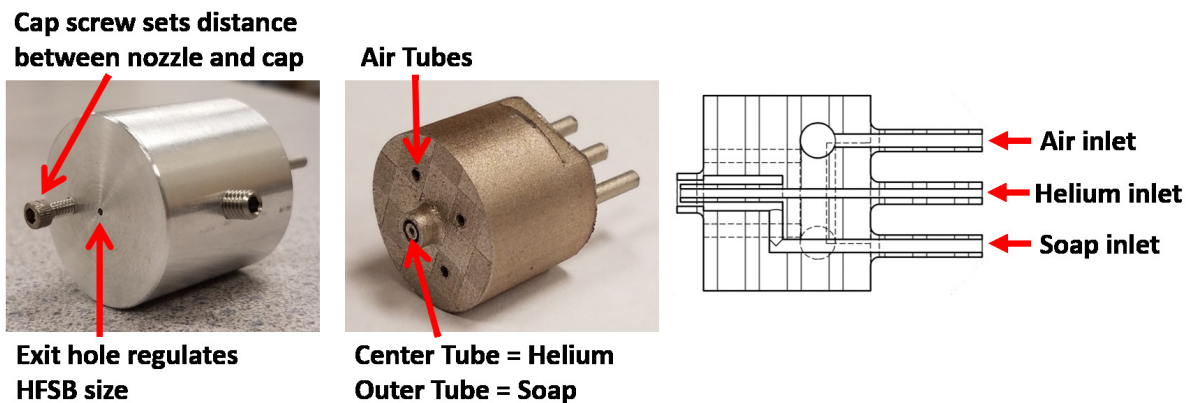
3D printed stainless steel orifice nozzle with machined cap (left), 3D printed nozzle without the orifice cap (center), and wireframe drawing of 3D printed nozzle showing internal design (right)
